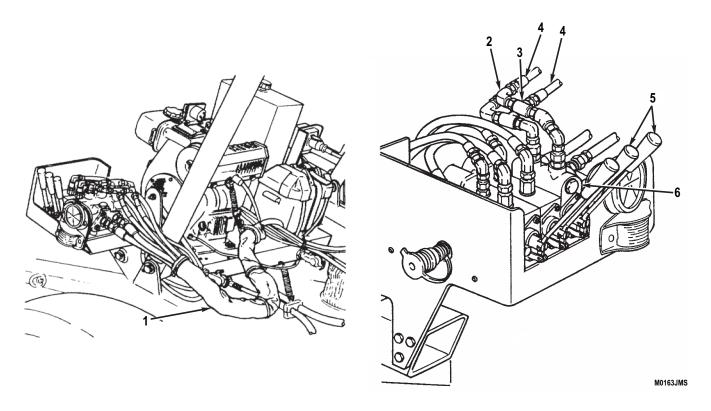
Hydraulic Control Valve-to-Hydraulic Positioning Cylinder Hose Assemblies Connections.
